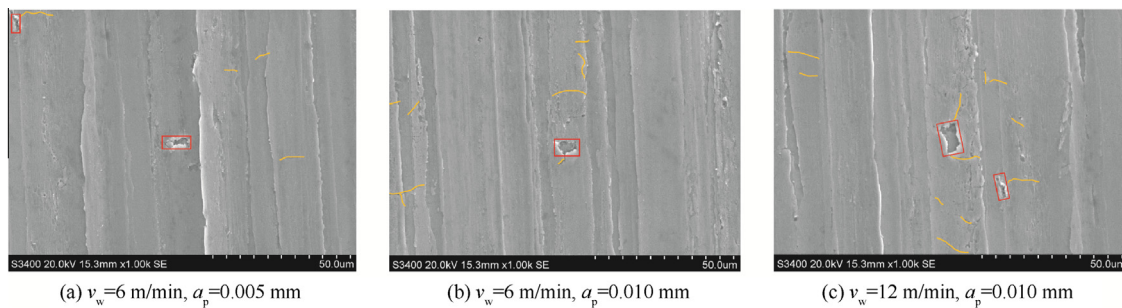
Typical surface morphology obtained with single-layer electroplated CBN wheel under different high-speed grinding parameters.
